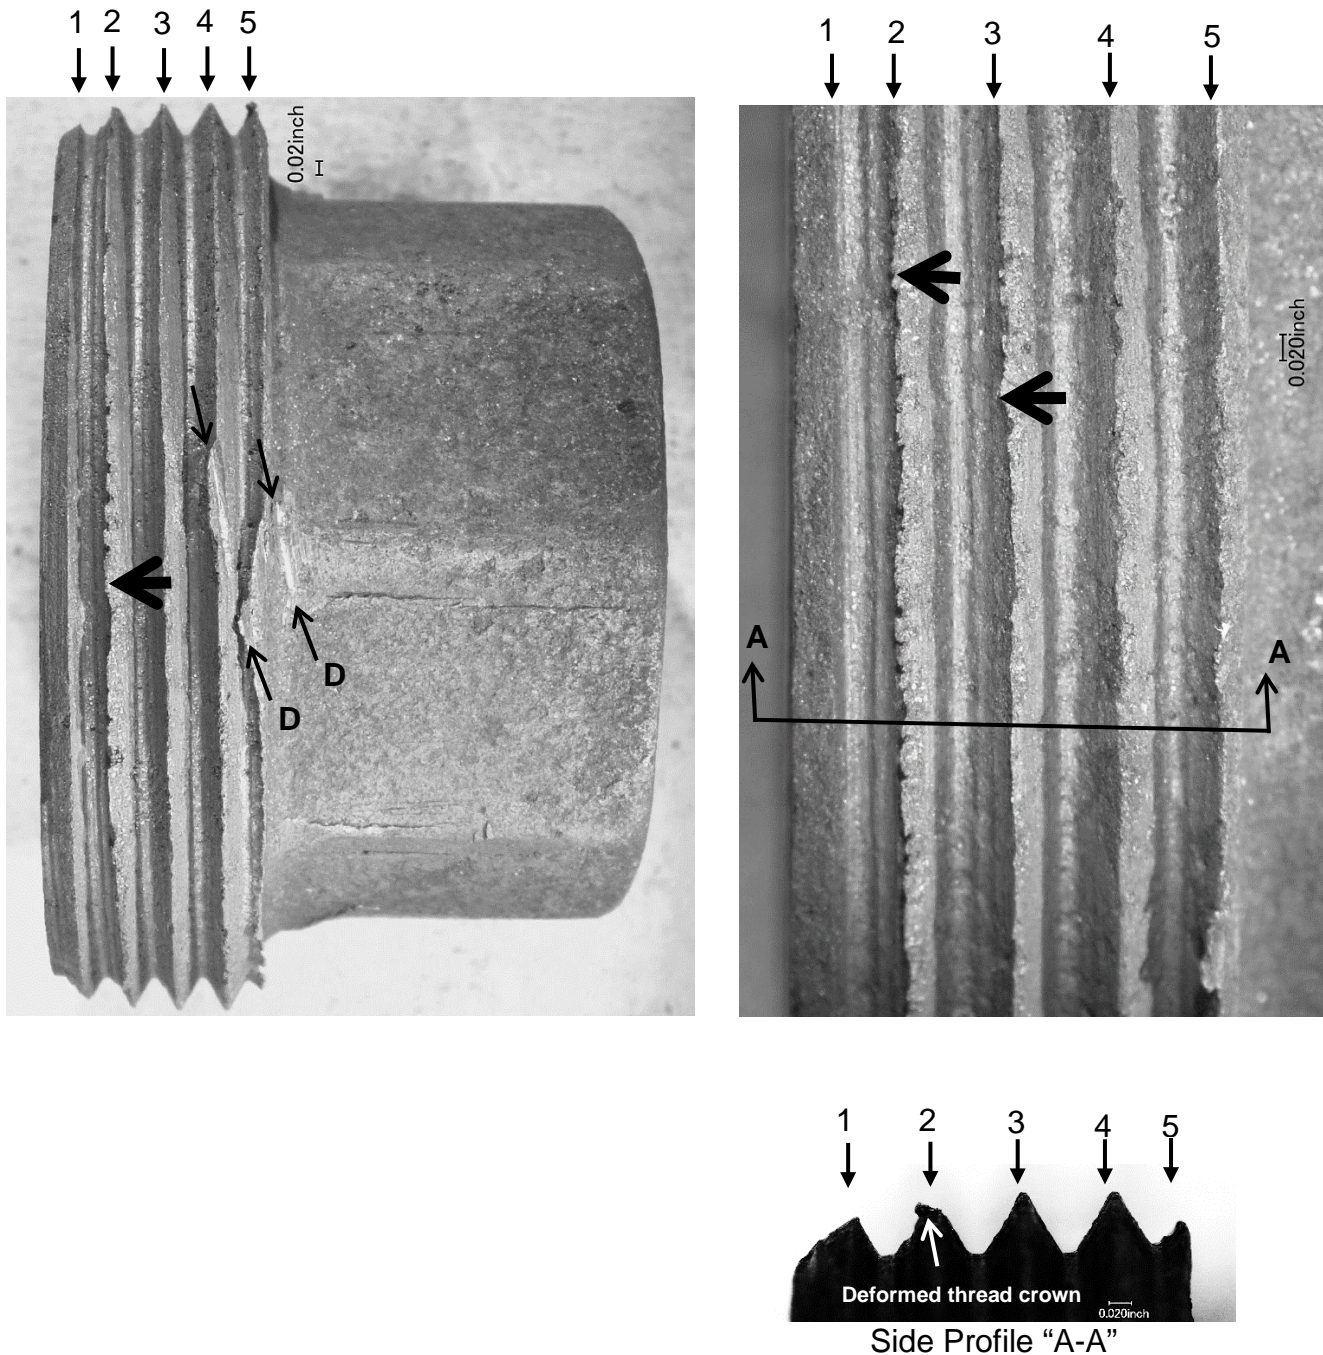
View of the disassembled union external threaded socket from the lower gas regulator (left upper corner of page); close-up photograph of the external threads (right upper right corner of page); side profile of external threads (lower right corner of page). Crown portion of the threads were randomly numbered "1" through "5". For the purpose of this report, thread "1" is the first thread. Minor deformation was found on the crown of the threads in the area indicated by unmarked arrows in the two upper photographs. Direction of metal flow is indicated by the unmarked arrows. Parallel dent marks are indicated by arrows "D".
